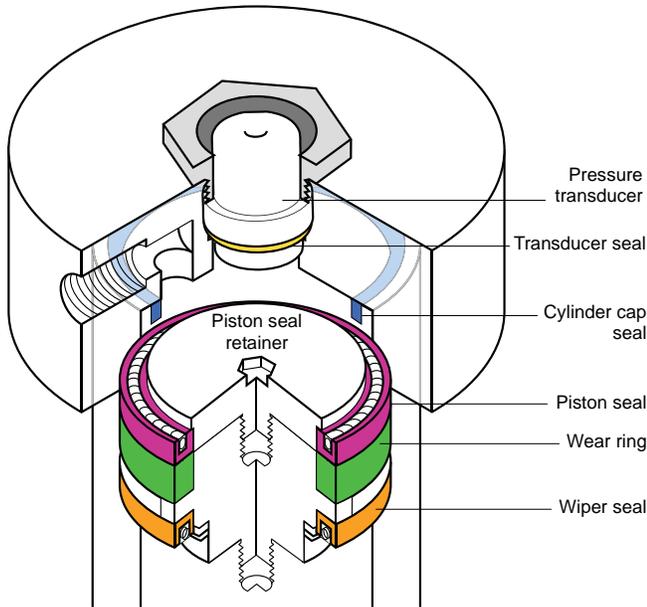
Cross-section of a piston with a piston lip seal (Standard)
